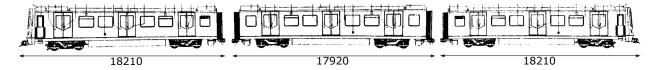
Technical drawing of the three MX3000 carriages with lengths given in millimeters [21].
